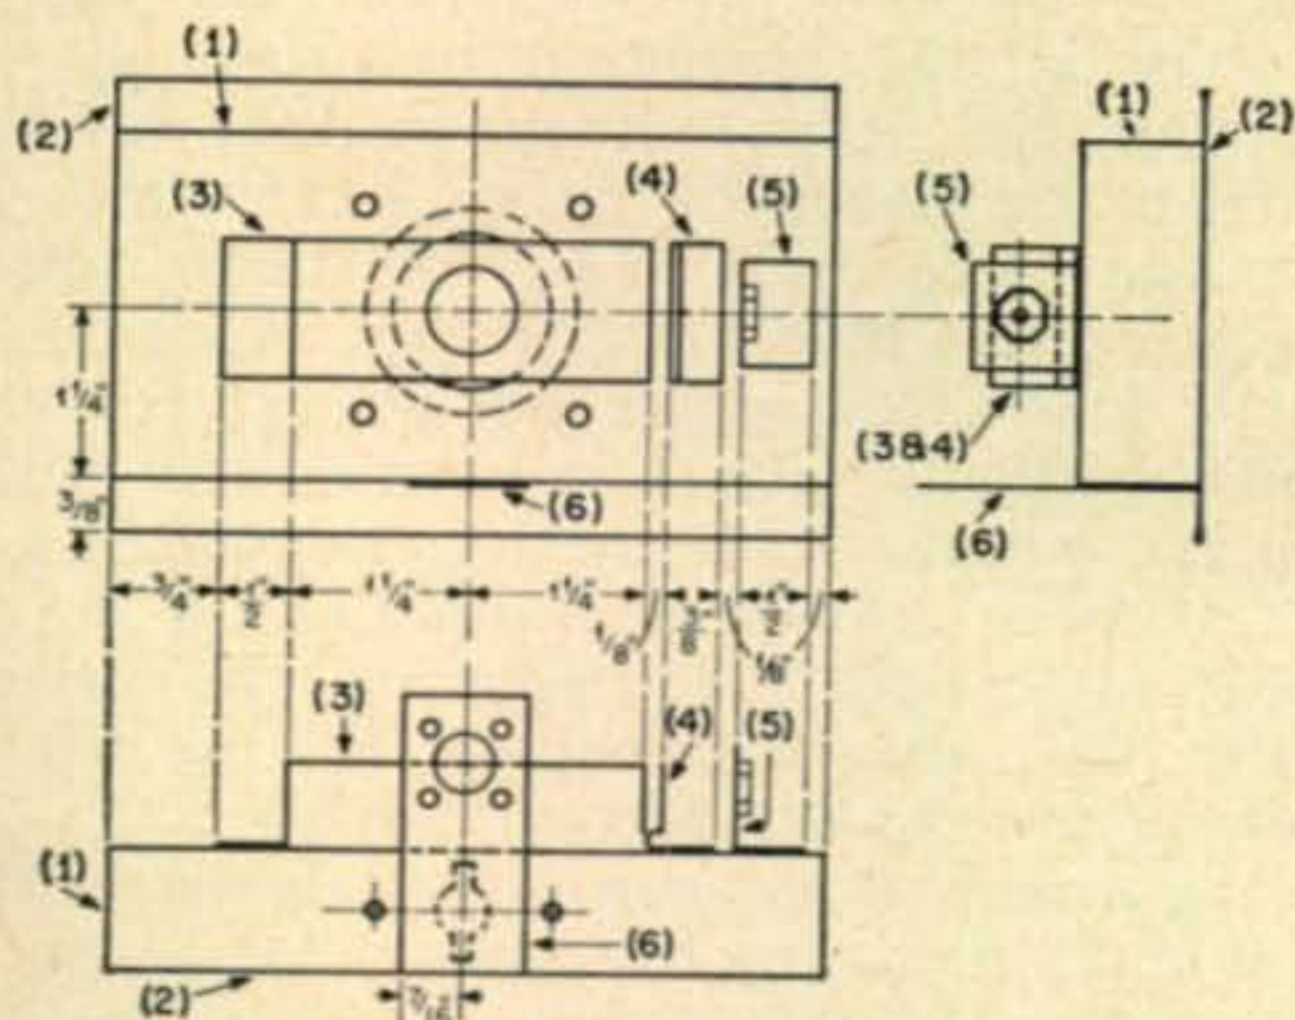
Partial assembly. Bracketed numbers refer to Piece numbers. Soft solder pieces together.
